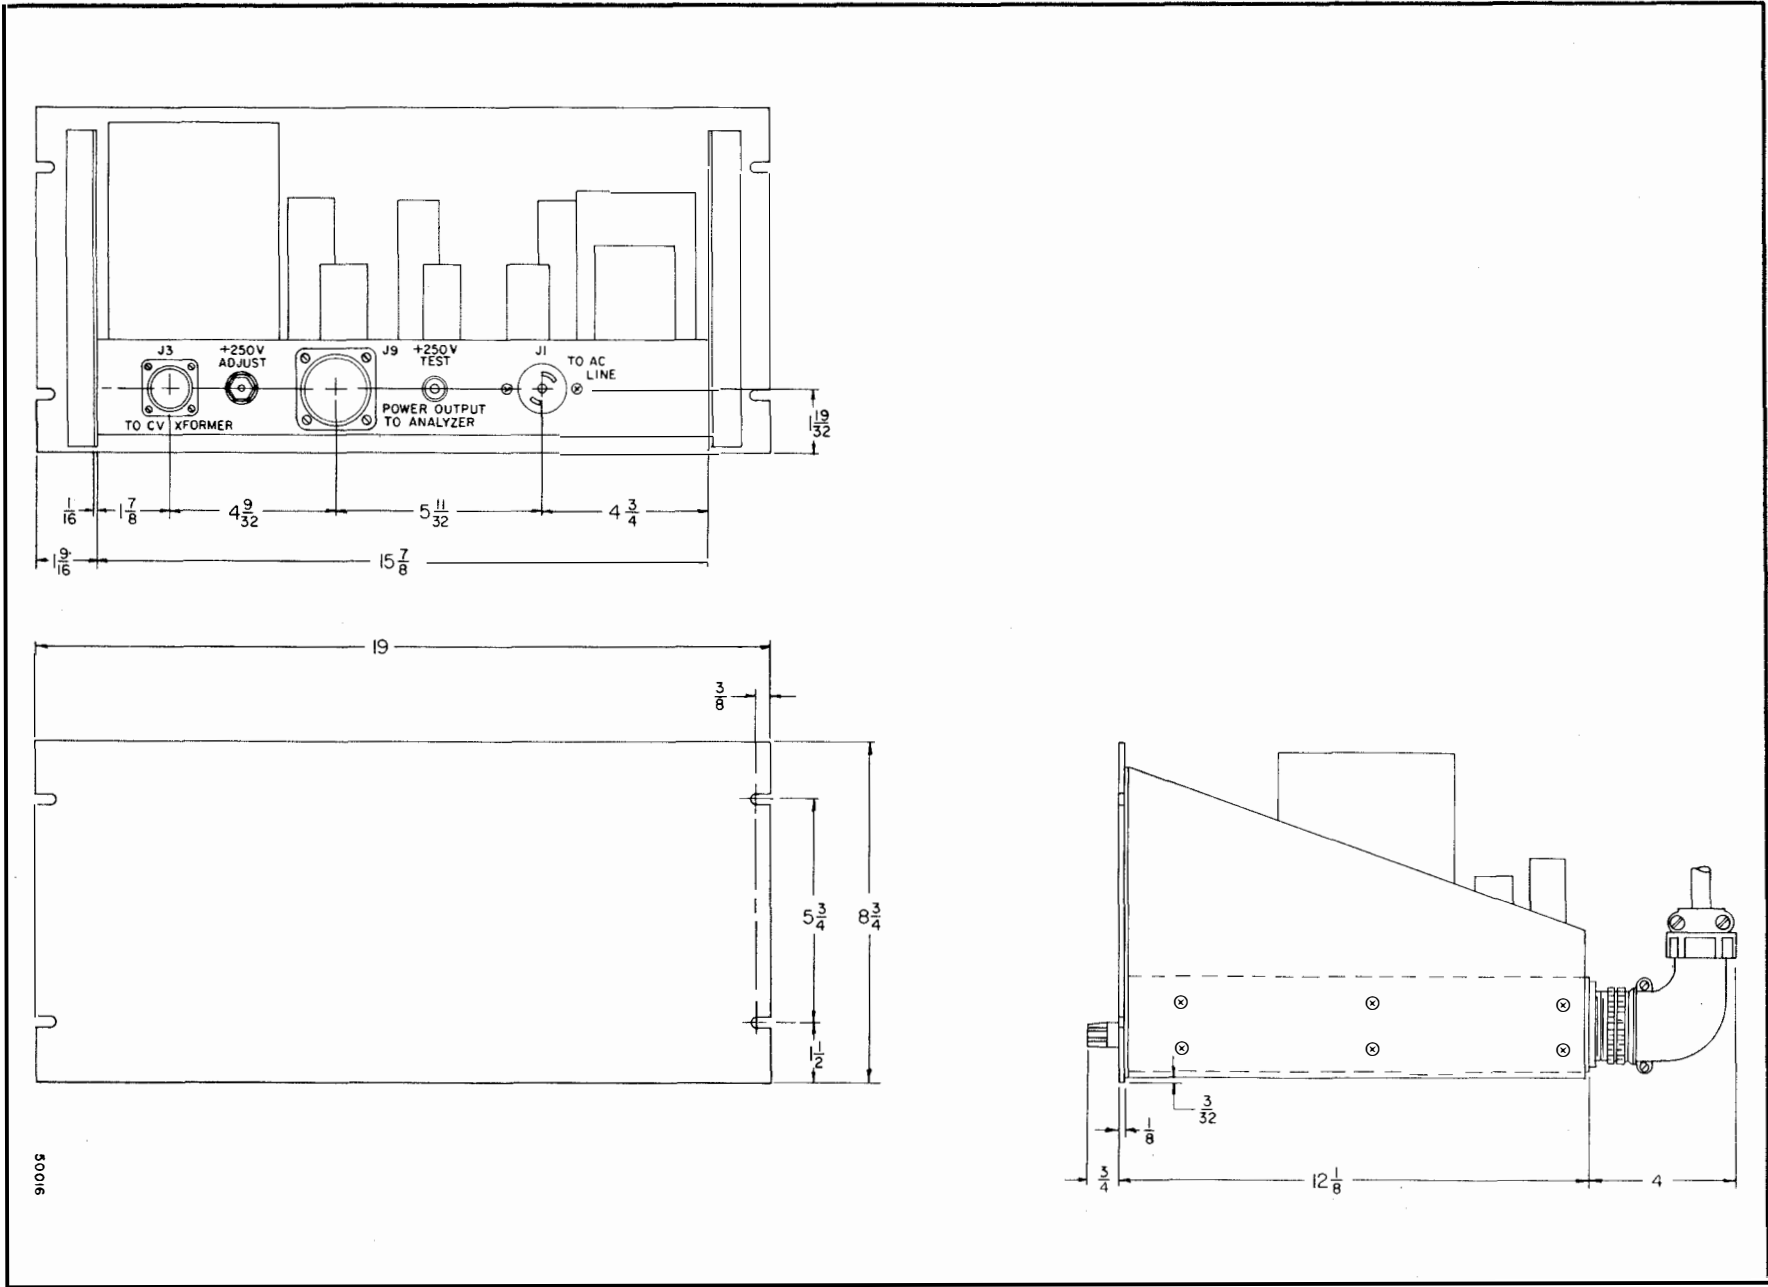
Outline Dimensional Drawing, Model PS-19, Rack-Mounted Style, Series 1
